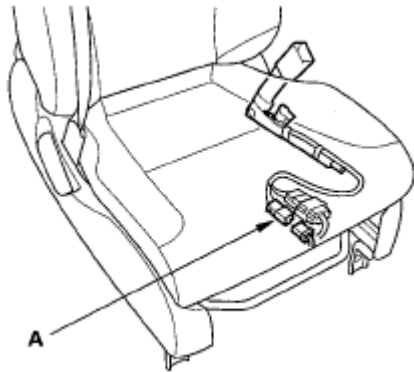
Identifying Front Passenger's Seat Belt Buckle Switch 3P Connector
